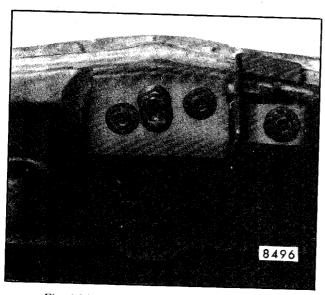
Hood Latch Striker - H-07,27 Styles
